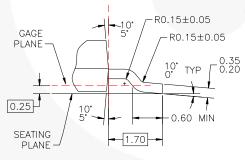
MOLDED PACKAGE, SUPERSOT, 3-LEAD
